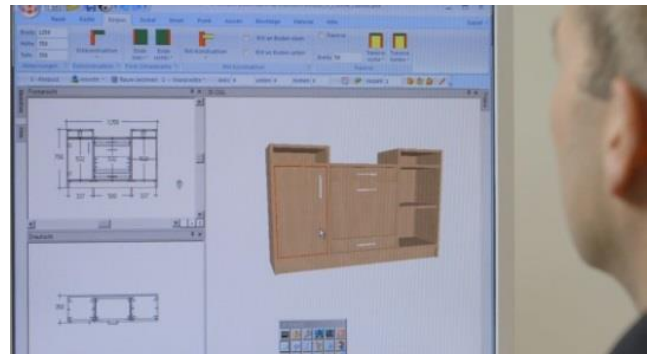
The process of drawing the furniture component that will be manufactured on the computer [5]
